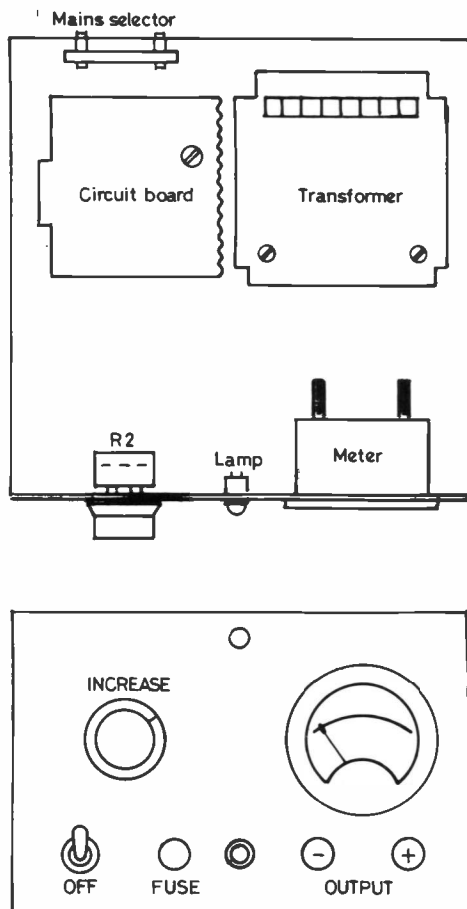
ADJUSTABLE SUPPLY CASE LAYOUT
